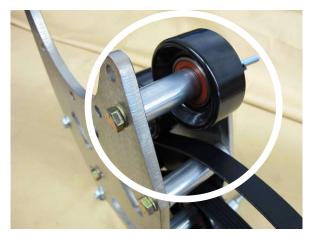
c: Remove Smooth Idler Pulley & Set Aside
